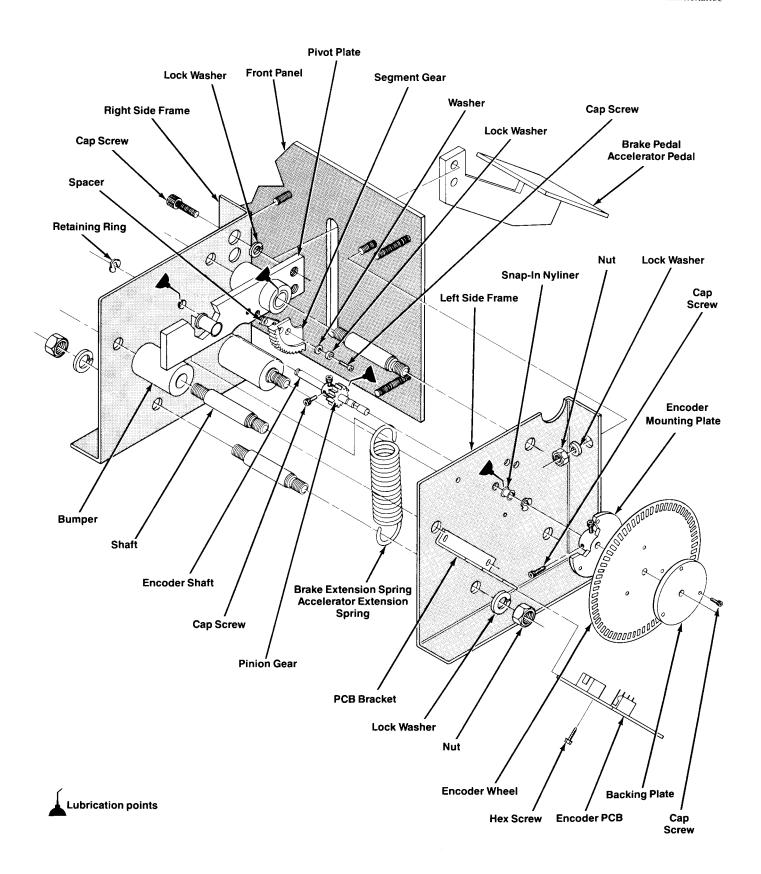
Lubricating and Disassembling the Foot-Pedal Control
